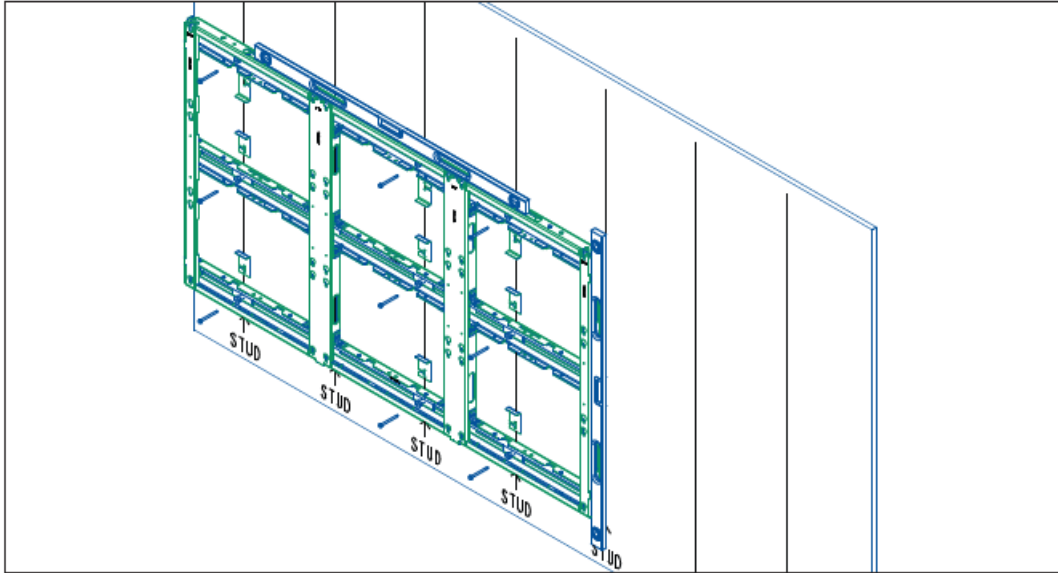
Install TEK Screws in Remaining Bolt Assemblies
